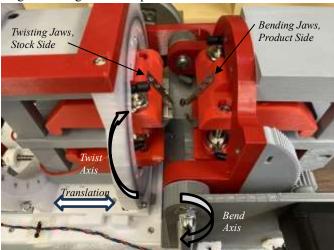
The prototype automatic plate bender, known internally as the "Bendy Bot".
